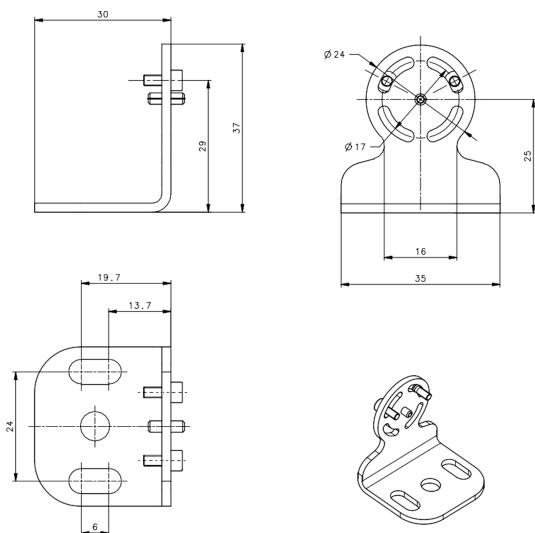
Accessories - order separately, installation bracket - rotatable, SLX4-MO-RB All dimensions are specified in mm.
